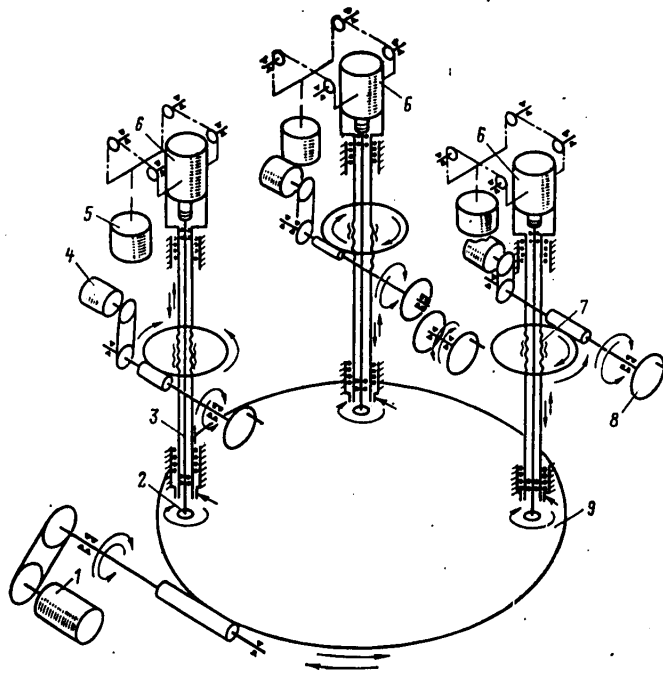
Mechanical Diagram of Type SASH-420M Diamond-Type Grinding Machine
